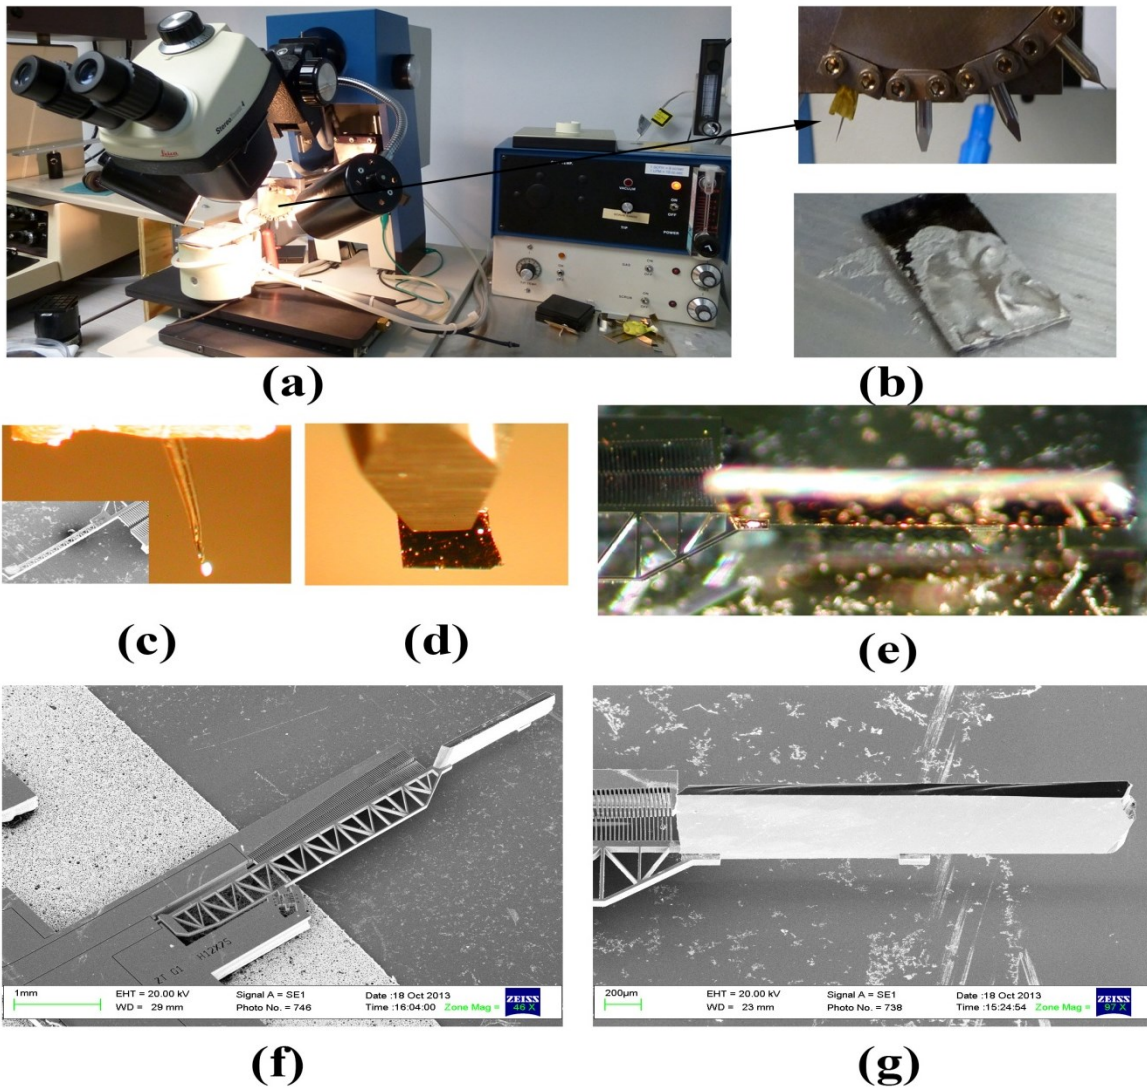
Mirror mounting setup and mounting process; (a) die bonding machine used for mounting the mirror (the enlarged part of the picture shows all available needles); (b) silver epoxy mixture; (c) drop of epoxy at the tip of the needle (the inset picture shows the epoxy on the mirror holder pad); (d) mirror picked up by a vacuum tip; (e) optical microscopic image of a mounted mirror; (f) SEM image of an actuator with mounted mirror; and (g) SEM image of a mounted mirror .
